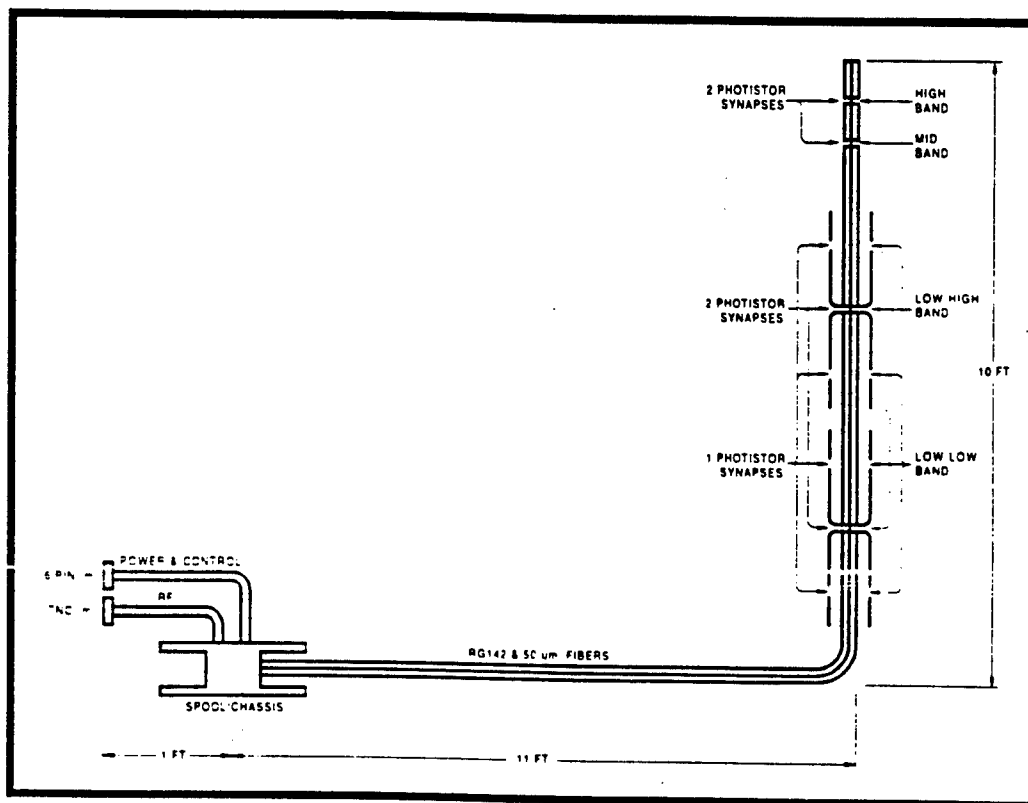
ANTENNA ASSEMBLY DIMENSIONS
